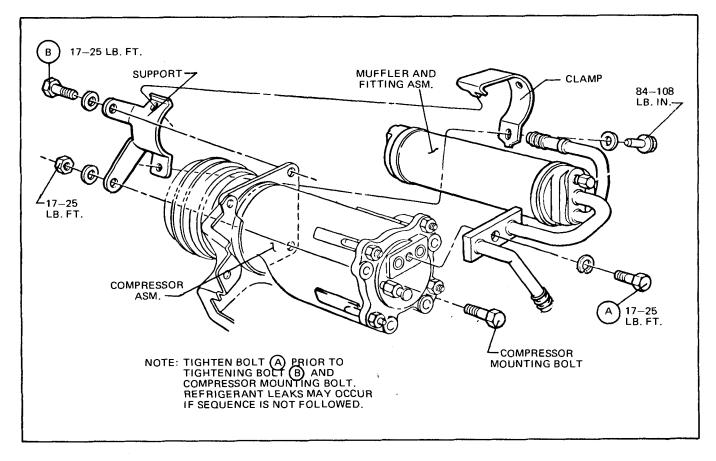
A-54 B Series Muffler and Compressor Fittings Assembly
